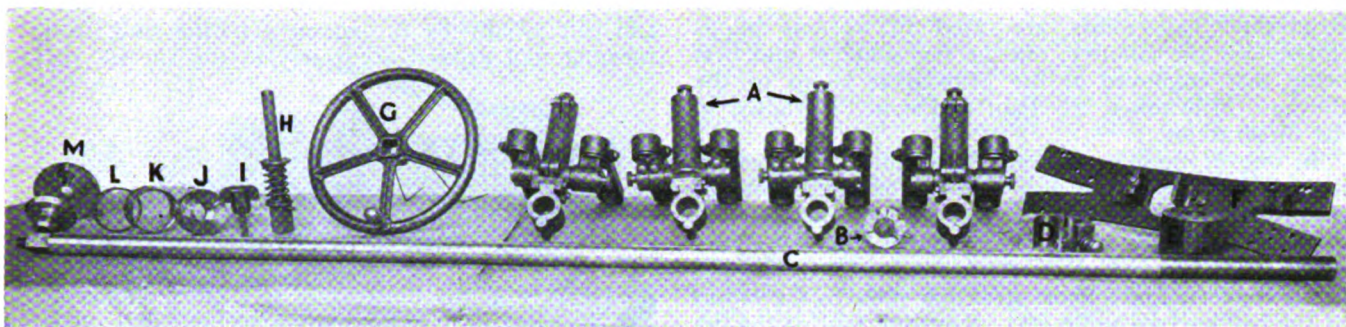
Details of the boring-bar for crank-shaft bearing seats and the facing and filleting tool for connecting-rod bearings
